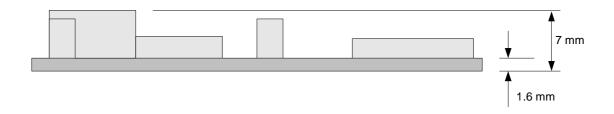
Medio P232: Mechanical Dimensions (Side View)
